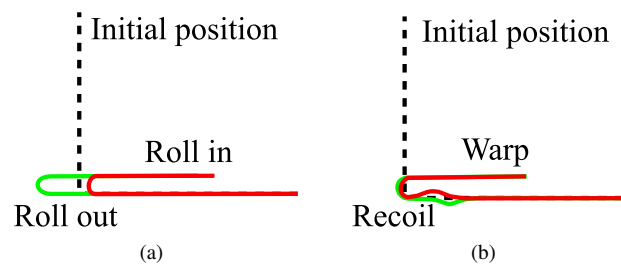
Common defects on the material part. (a) Roll in and roll out in a sample sheet. (b) Warp and recoil in a roll hemming sample sheet.
